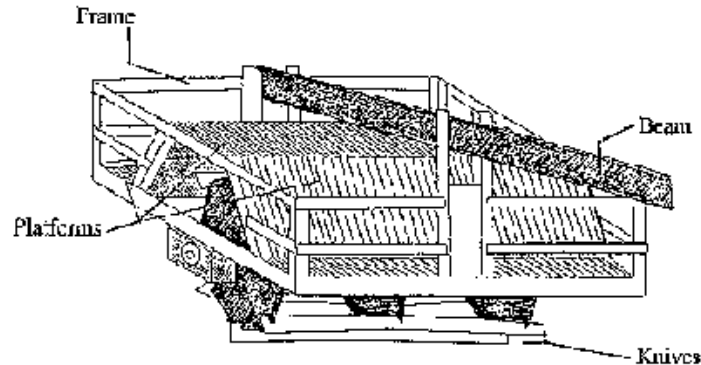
The roller cutter consists of an iron frame with the platform on which to put load, the axle with the rotating knives to clear and the beam to attach it to the harness.
